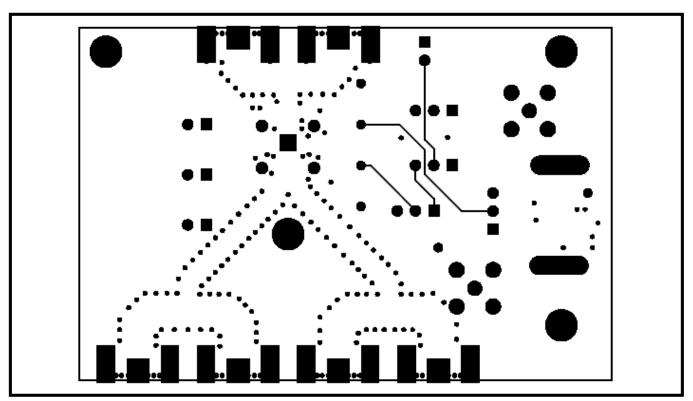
MAX3942 EV Kit PC Board Layout—Solder Side
